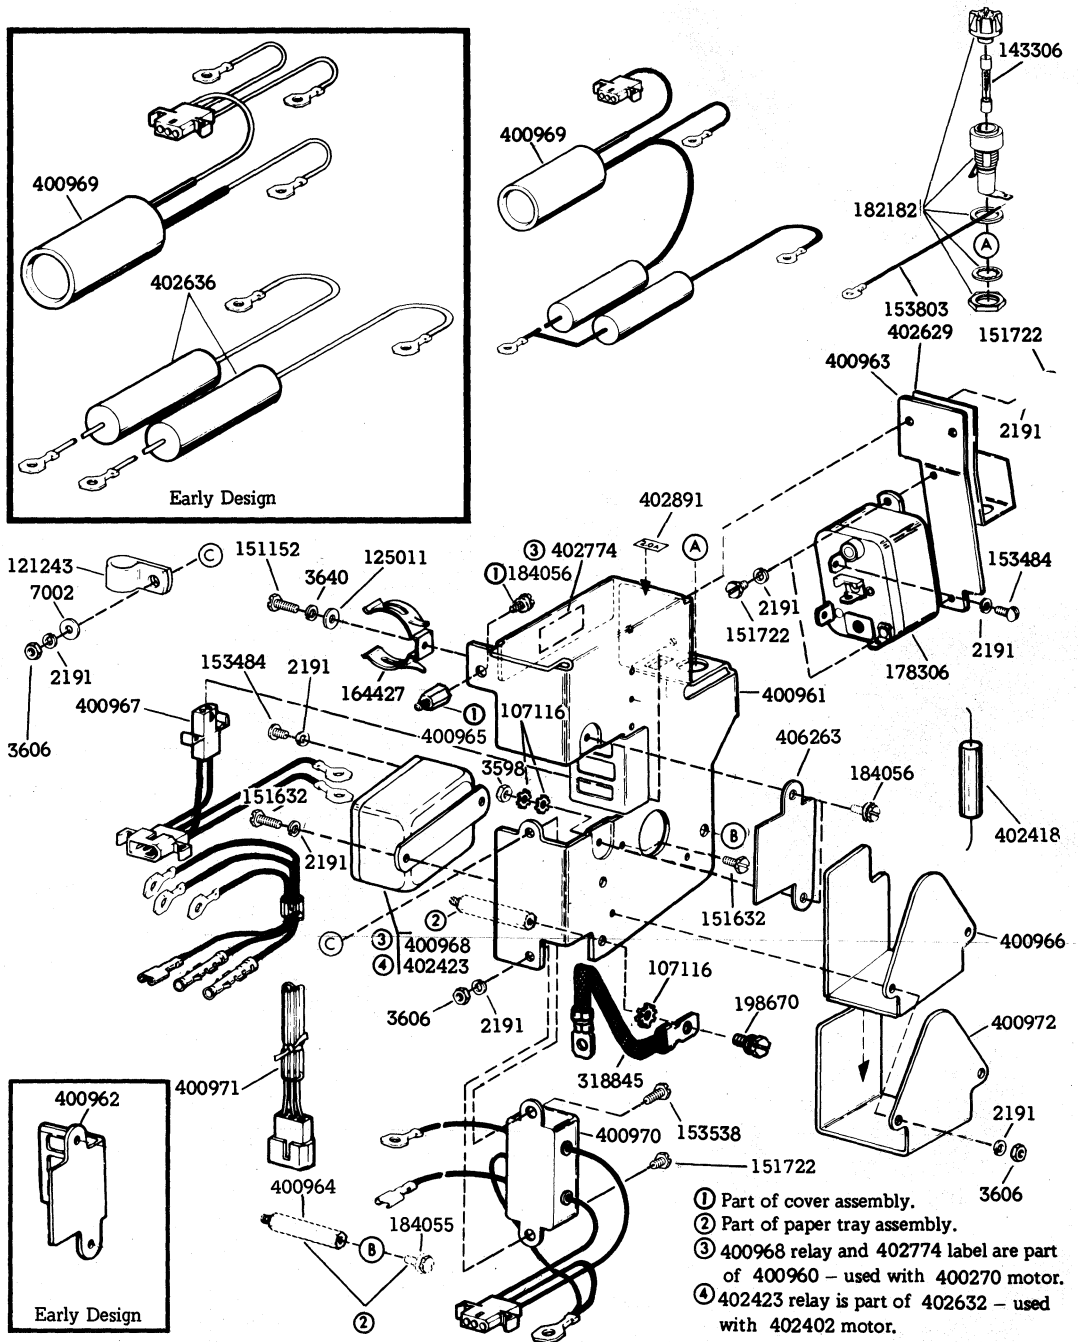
400960 or 402632 AC Input and Motor Control Assembly (Friction Feed Only)
